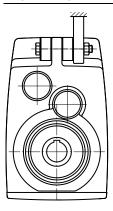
Mounting the rubber buffer (Option G and/or VG) on parallel shaft gear units
